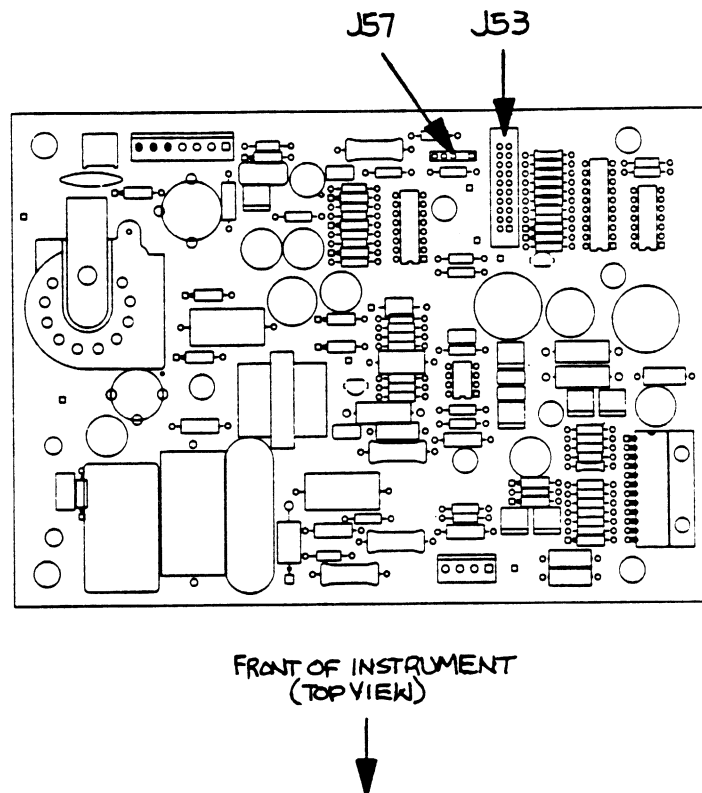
Connector locations for removal of the AB CRT Driver Board.
